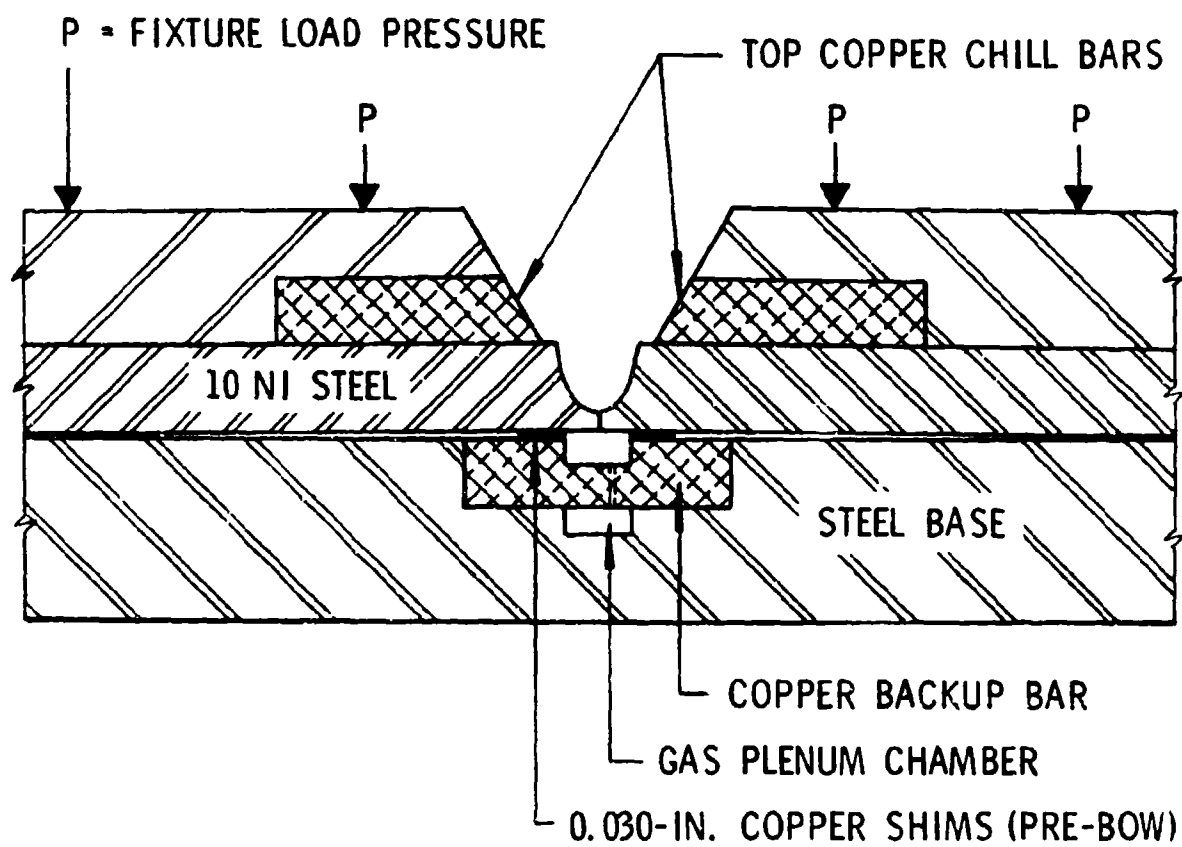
SECTION OF GTA WELD FIXTURE
